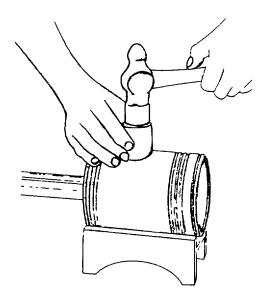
Installing Piston Pin Retainer Using Tool J23762.
